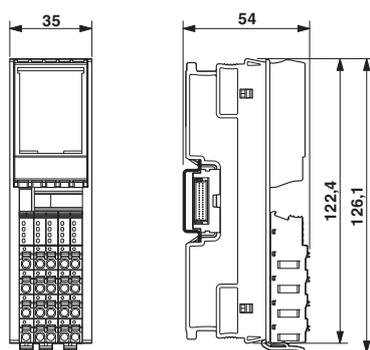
Nominal dimensions of the H housing with one terminal field
